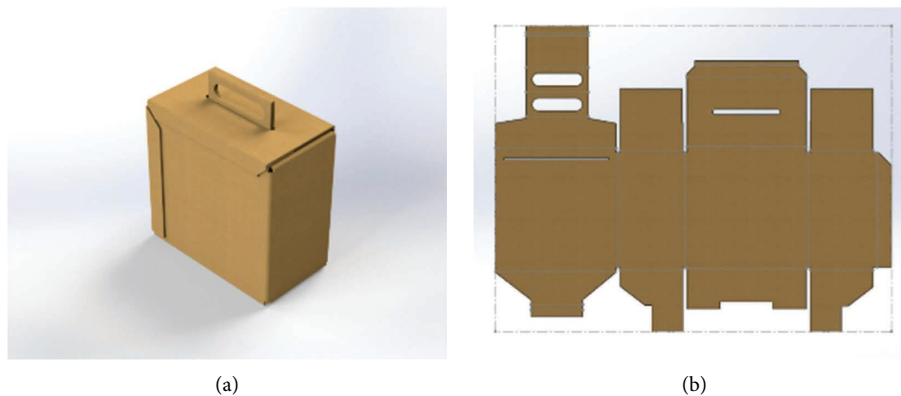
CAD modeling of packaging corrugated paperboard box: (a) 3D model and (b) die-cut.
